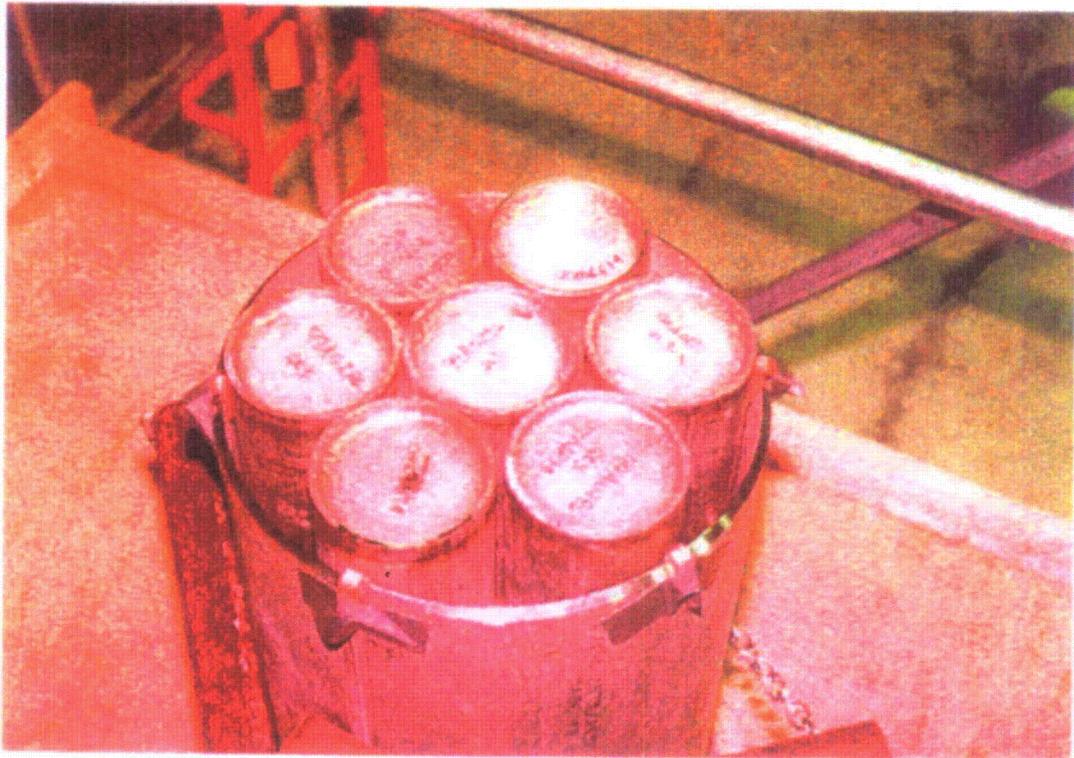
HICs End Plates In-Place and Welded (Canister 18-10-90-06)
